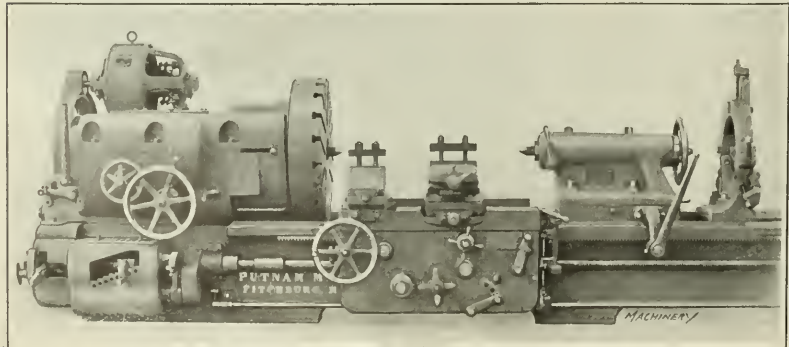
Putnam 42-inch Engine Lathe for machining Gun Forgings
